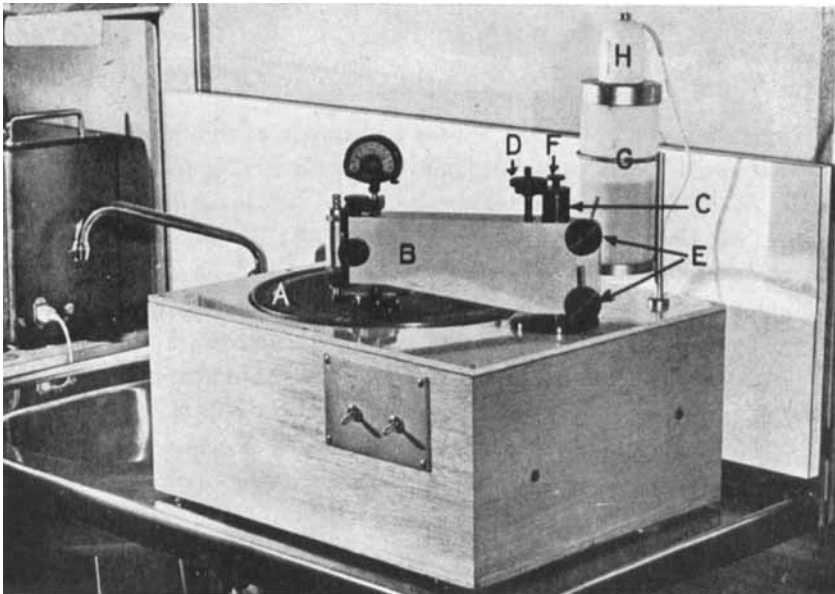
The lapping machine. The letter A denotes the lapping disk. The letter B designates the object arm that may oscillate about the shaft marked C. A wheel to alter the height of the arm of the shaft, is indicated by D. Set screws to clamp the arm to the shaft are designated by E. The letter F denotes the clutch handle by which the arm may be released from the driving unit, so that its free end may be swung to the right. A vessel containing the lapping (compound) and its suspensory medium is indicated by G. The letter H designates the motor driving a little propeller that serves to keep the lapping compound in suspension.
